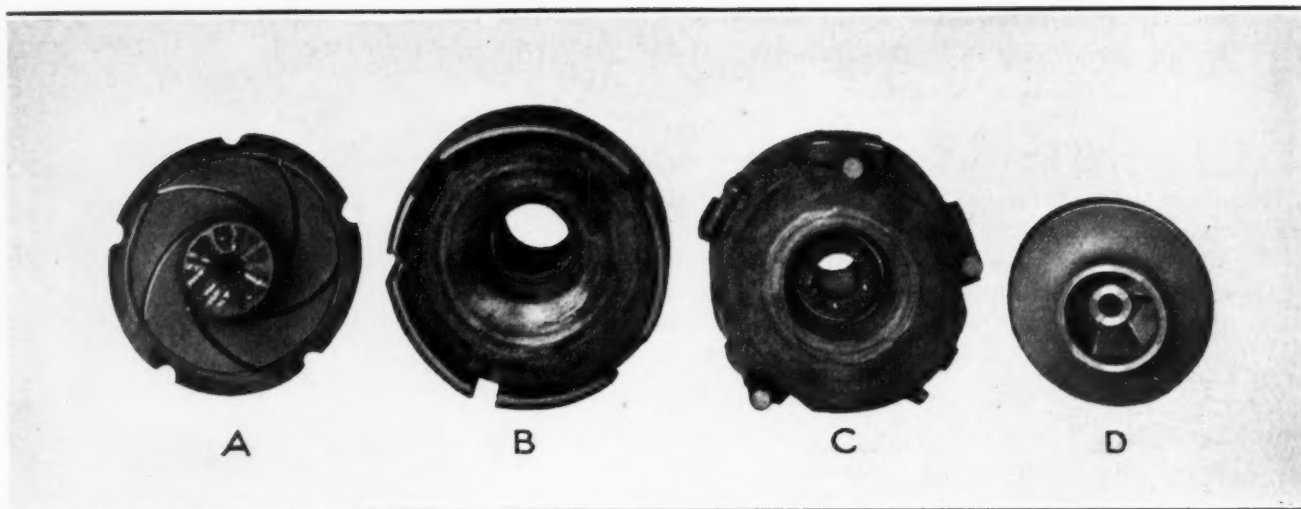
The Die and Sand Core which Produce Pump Impellers of the Type Shown at D
